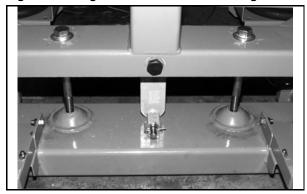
Tilting Mid Frame to Floor Locking Bolts
